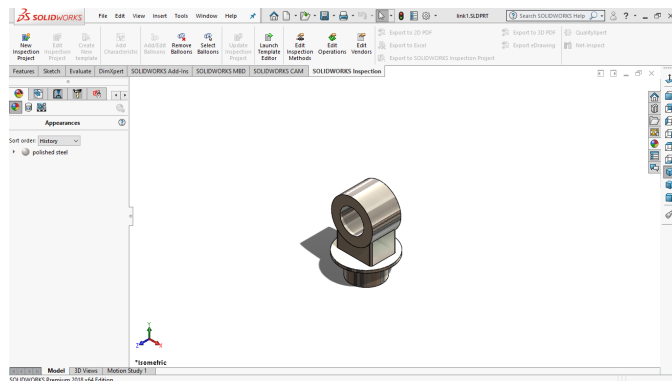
Drawing canvas to draw each arm's part in Solidworks software
